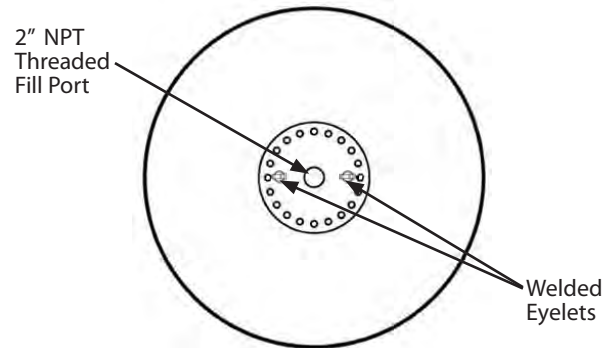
Plan view of the Pro Barrel® with heavy duty top cover plate. Bottom blank plate is the access hatch for cleanout.
